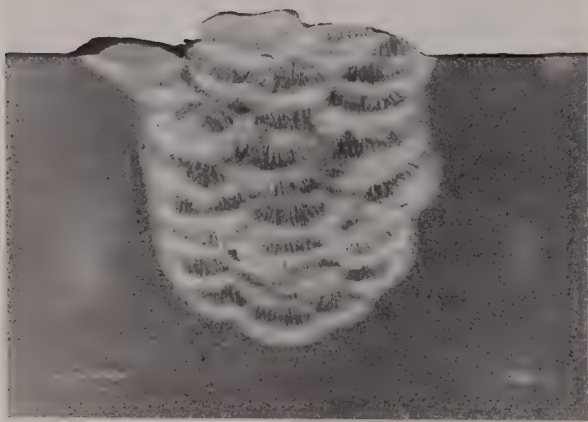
Seam welded at a pre-heating temperature of 150 °C
